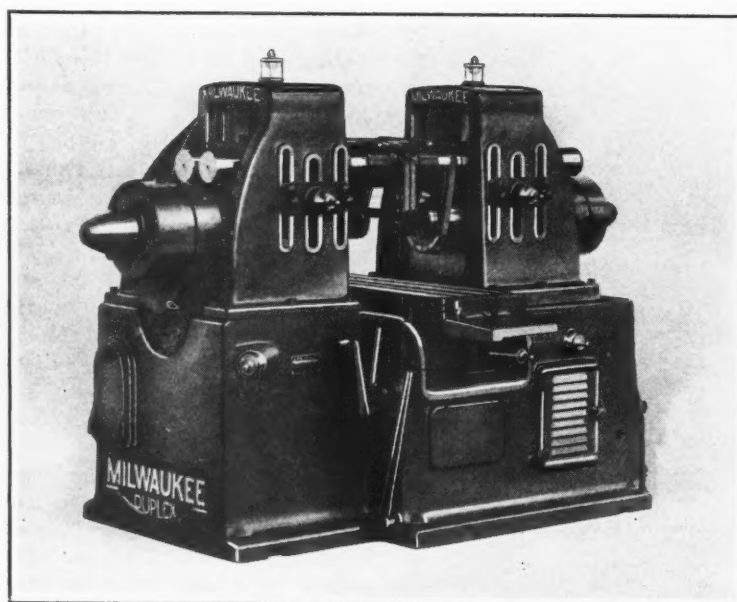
Milwaukee Duplex Milling Machine Designed to Use Tungsten-carbide and Tantalum-carbide Cutters
